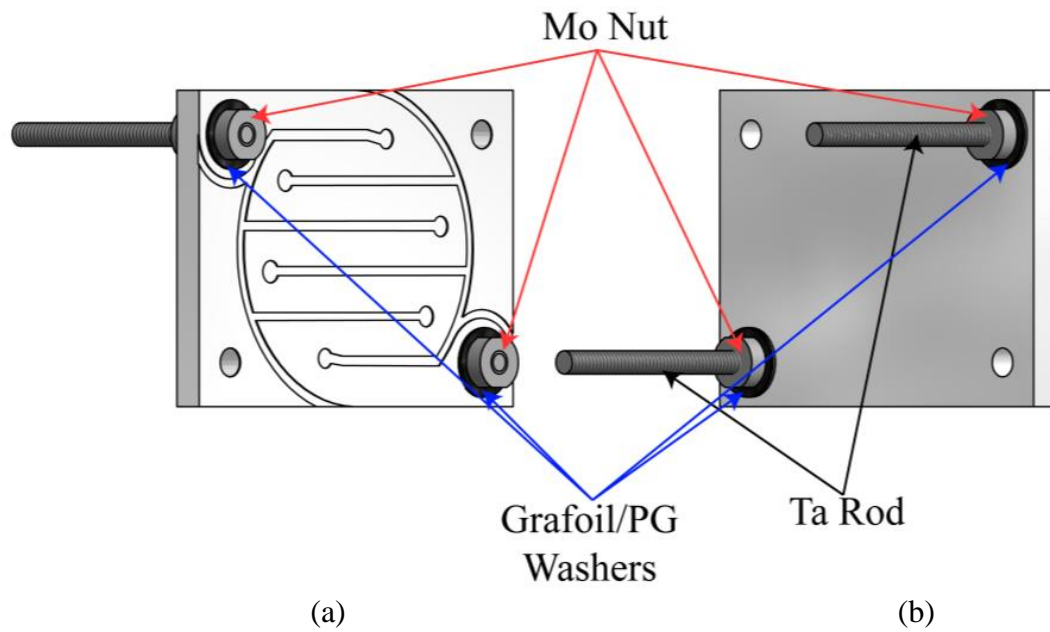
Schematic drawing of the (a) front and (b) back sides of the assembled heater.
